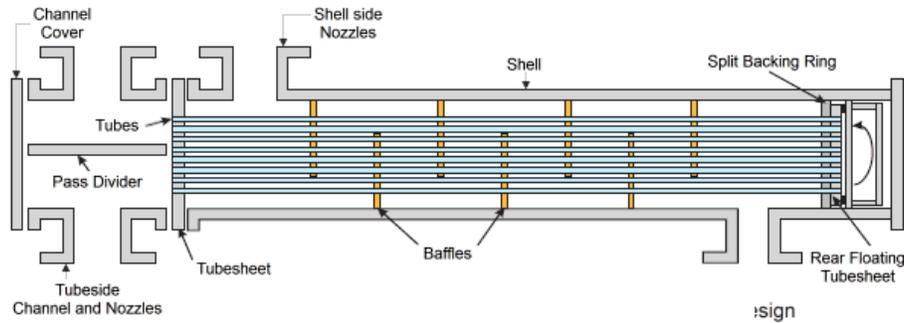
Diagram of Pull-Through Floating Head Shell-and-tube Heat Exchanger [72].
